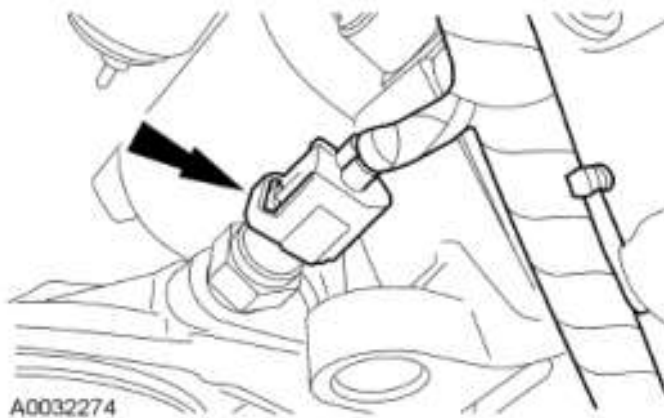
Locating Engine Oil Pressure Sensor Electrical Connector
